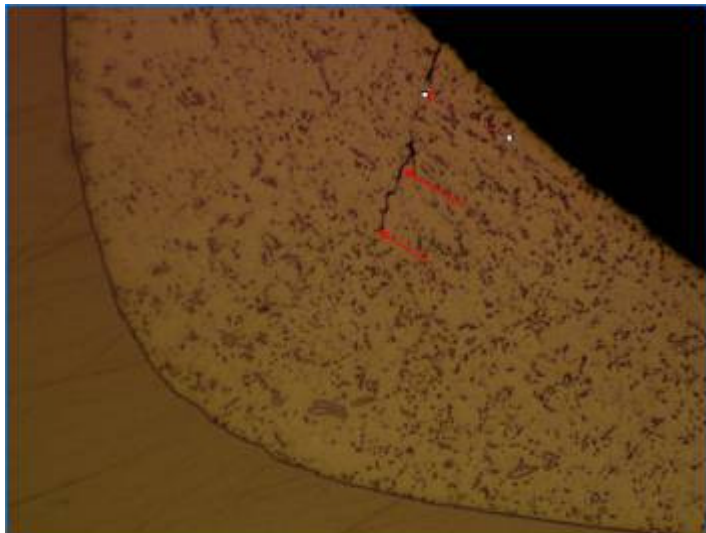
cross section, SN66, U61, right lead solder crack, 400x
